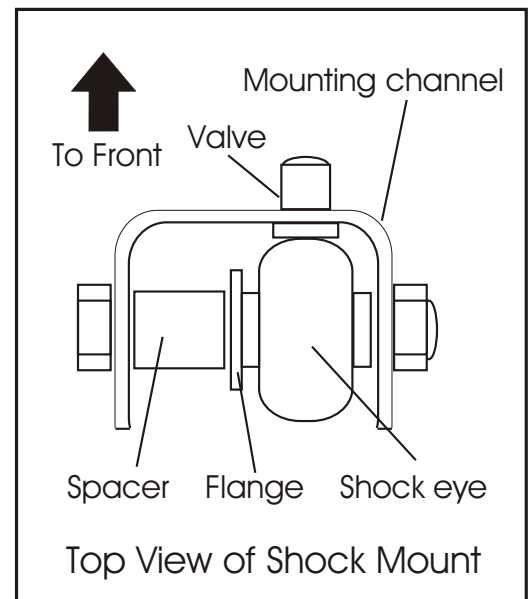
Top view of upper shock mount. The flange on the shock bushing must face toward the spacer. The valve should point toward the front of the bike
